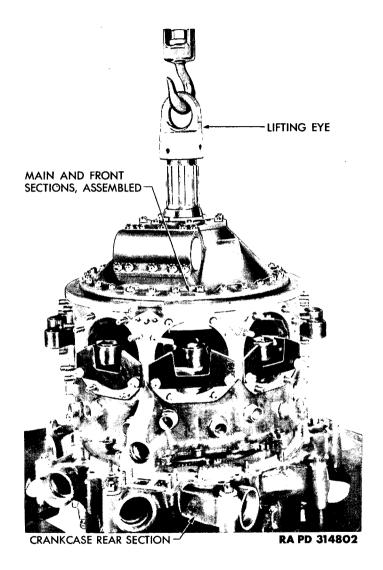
Removing Main Crankcase Section with Lifting Eye 41-E-615
